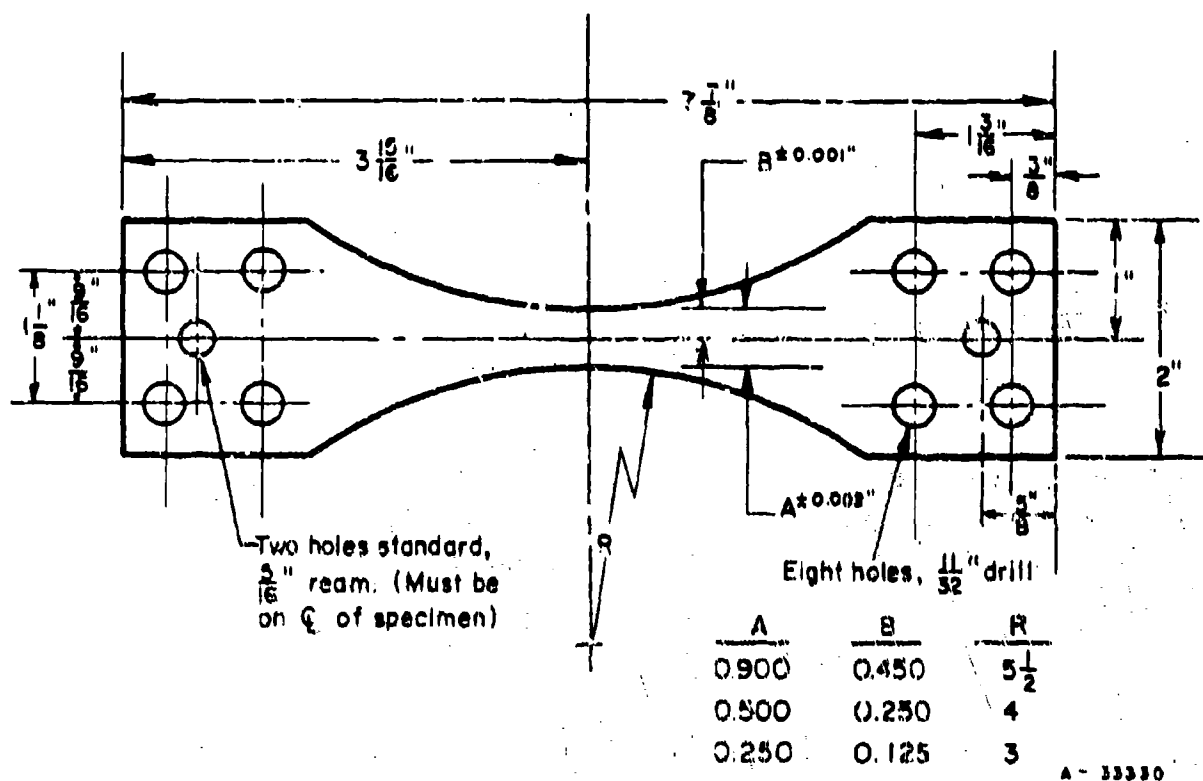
UNNOTCHED SHEET FATIGUE SPECIMEN
